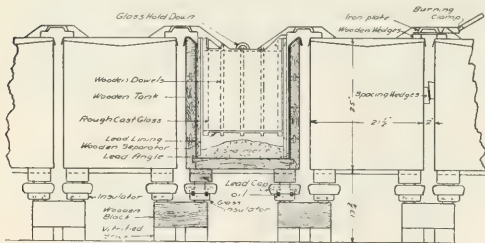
TYPE OF CONSTRUCTION NOW USED
